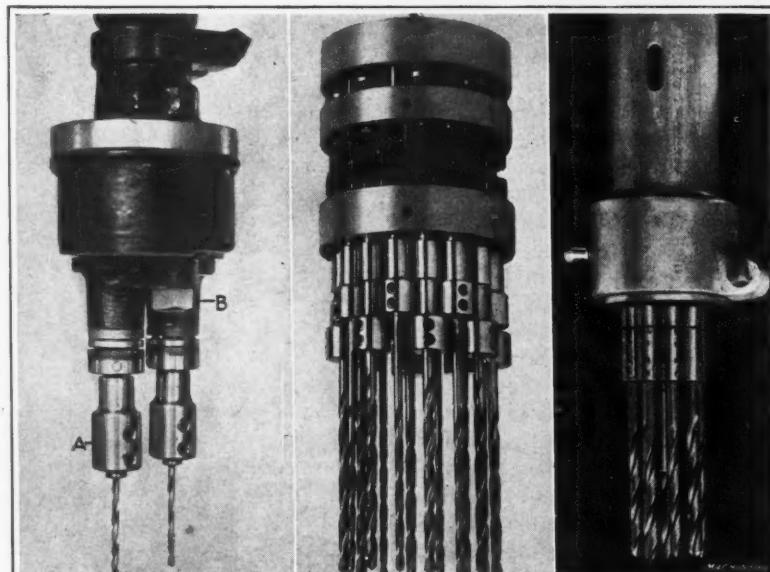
Two-spindle Head with One Fixed and One Adjustable Spindle
